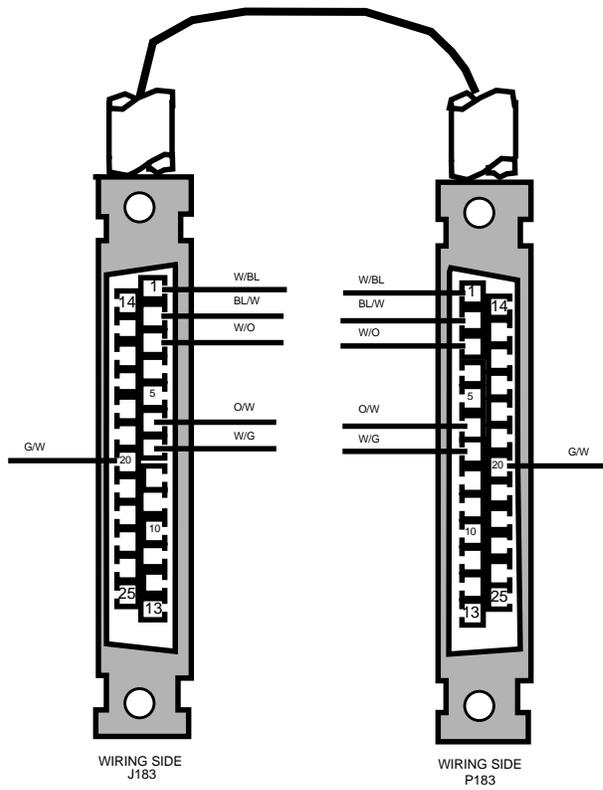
Cable Assembly ED7C723-30 Group 18
